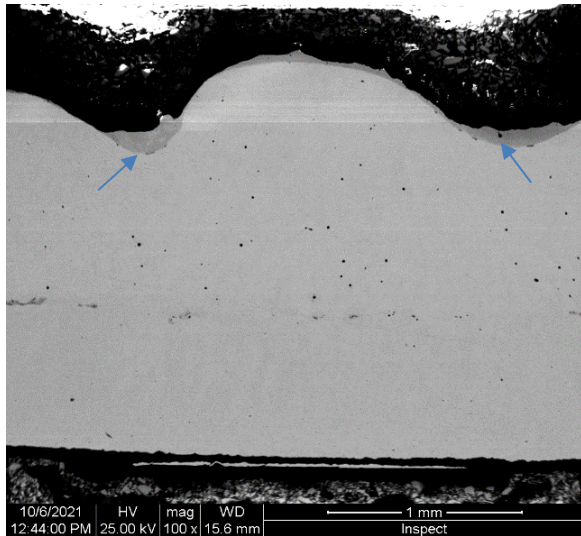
Al-rich crust on the weld point for sample 1.2
